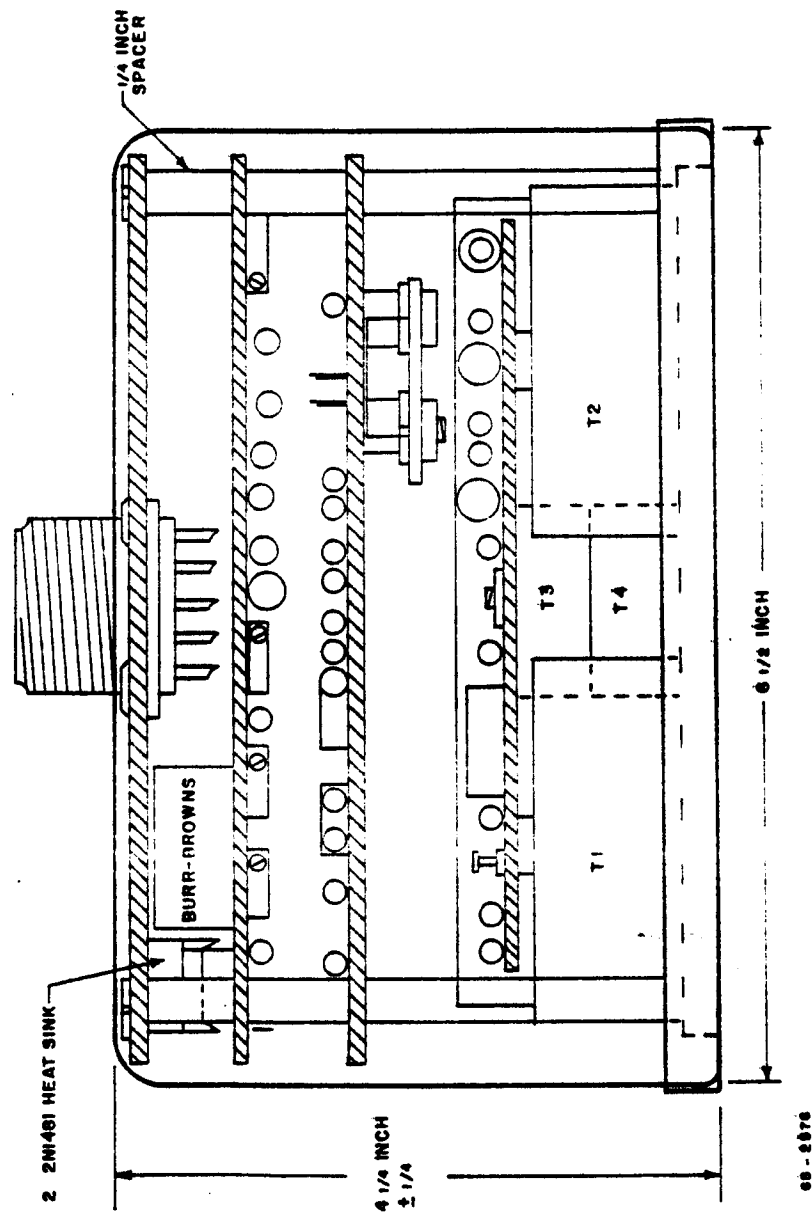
SECTIONED VIEW OF THE CONTROL LOGIC TEST PACKAGE
